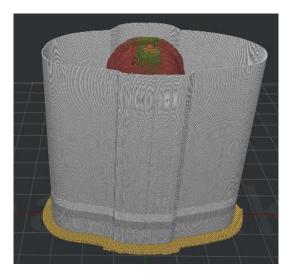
Set "Wipe Wall Type" to be "Vertical".
